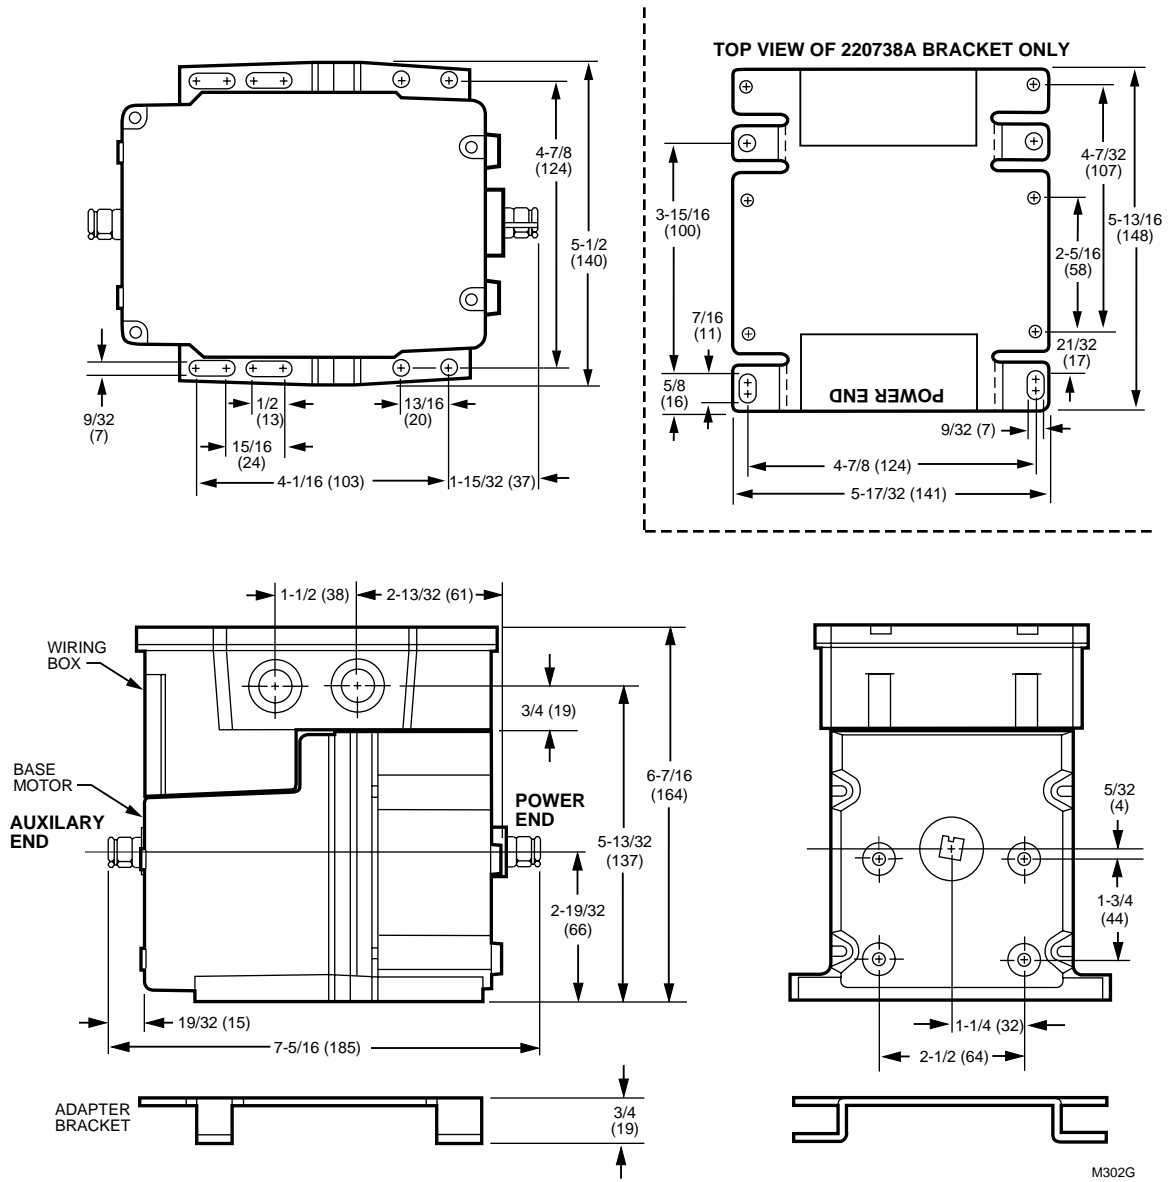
Dimensions of M7164, M7184 motors in in. (mm). Note: M7161 does not have auxiliary shaft. All other dimensions are the same.
